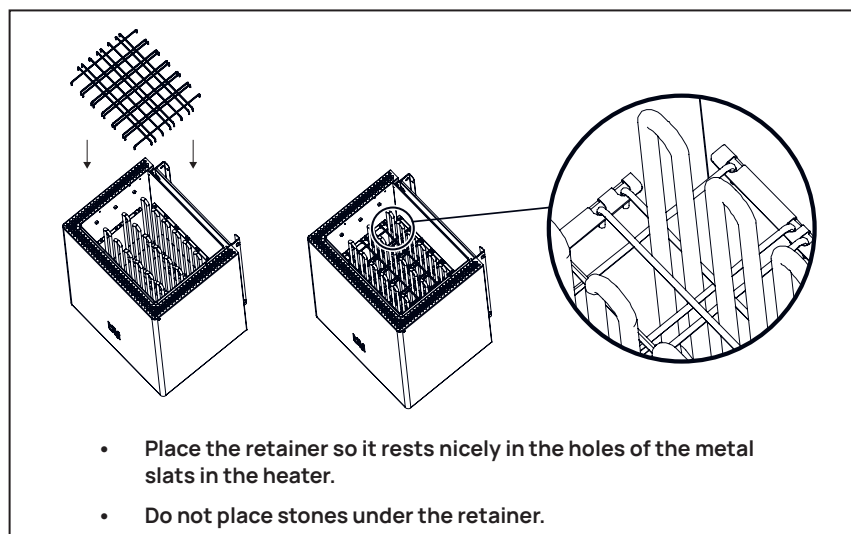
Installation of the retainer of HUUM CORE Wall and CORE Wall Combi.
